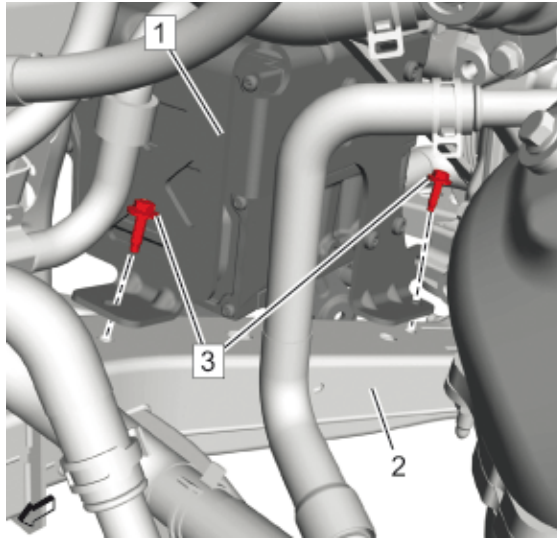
Heater Coolant Heater Bracket Assembly And Bolts
